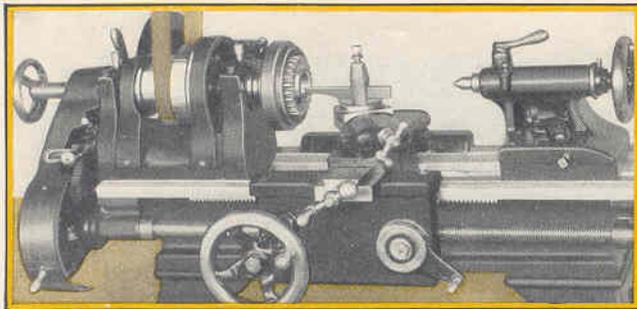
Boring a Pinion Gear Held in Step Chuck.
